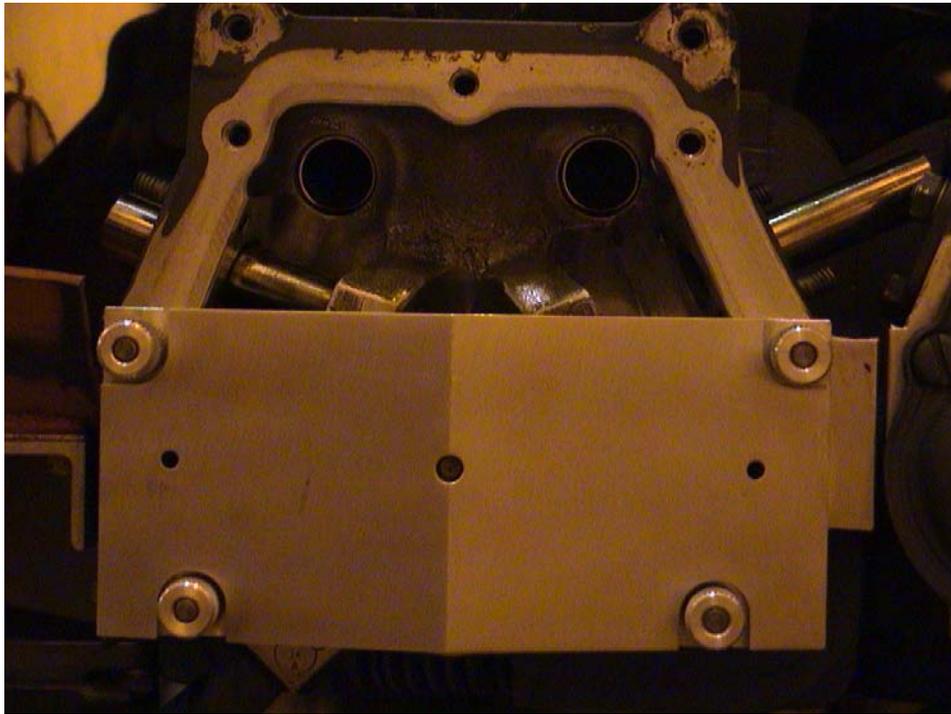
INSTALLATION OF CESSNA ULA-017 GAUGE ASSEMBLY
